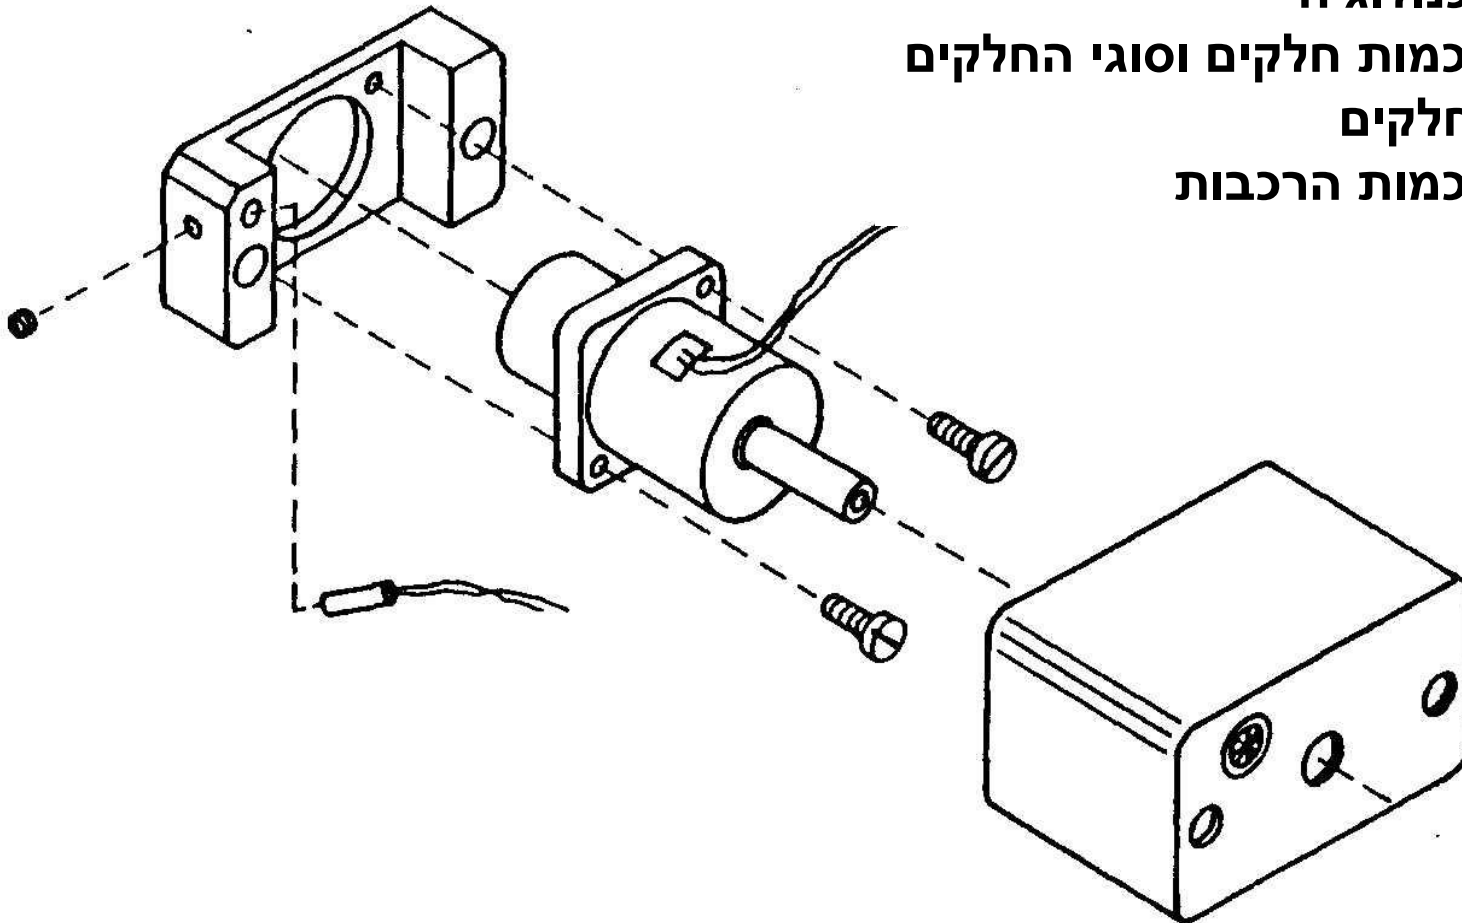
Redesign of motor drive assembly following design for assembly (DFA) analysis.
